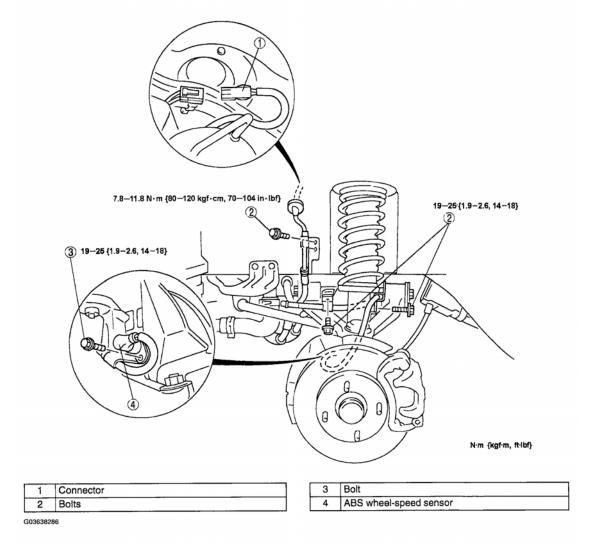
Exploded View Of Front ABS Wheel-Speed Sensor & Torque Specifications Courtesy of MAZDA MOTORS CORP.
